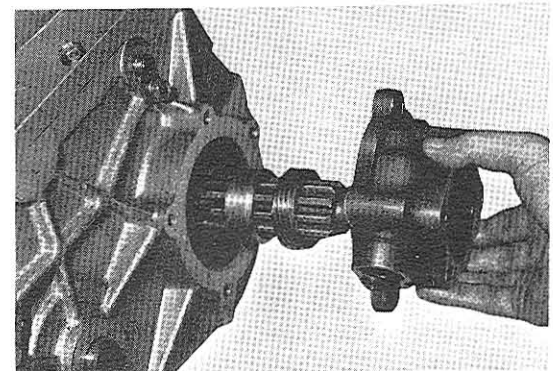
Removing Speed- V0451 ometer Drive Gear and Spacer
